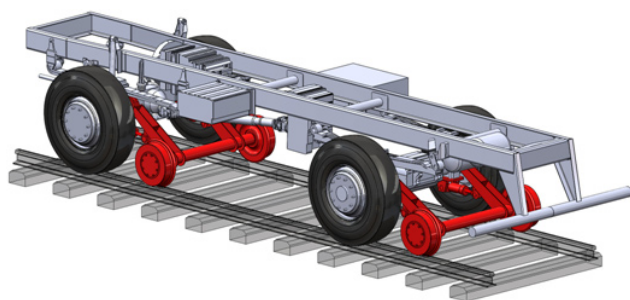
Rail running gear system with single axles - axonometric projection
